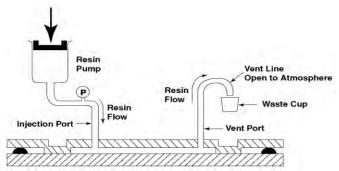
For the Pressure to Atmosphere Head, a pump supplies pressurized resin to the injection part and the vent part is open to the atmosphere.
